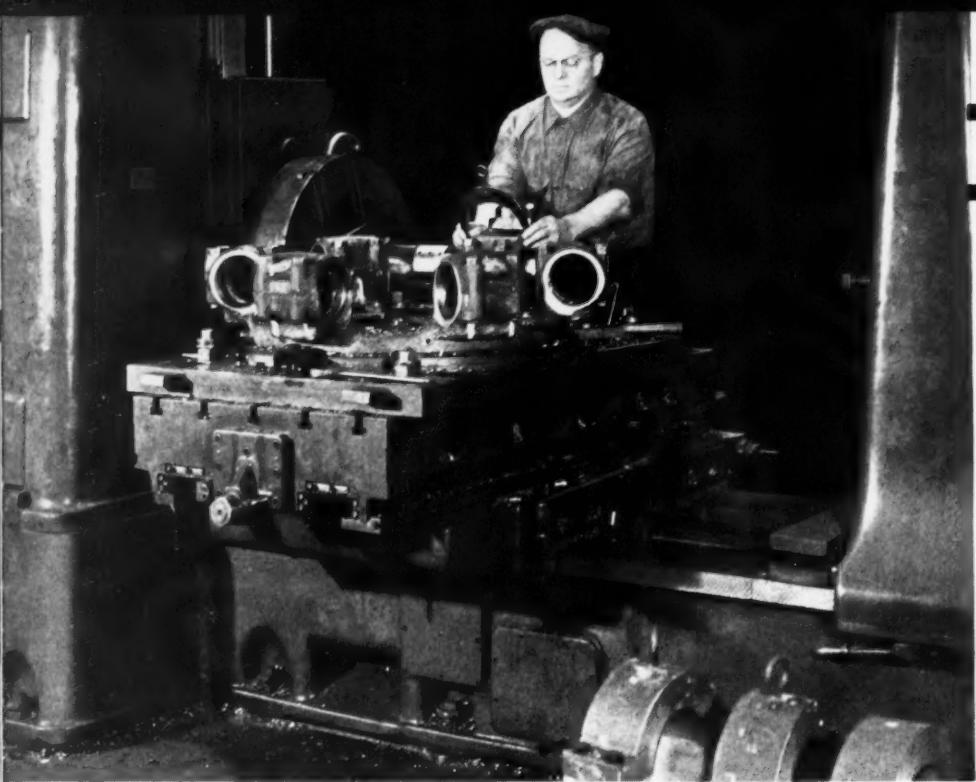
(Left) Another Giddings & Lewis Horizontal Boring Mill Face-milling, Boring, and Grooving the Six Pockets of the Quill Drive
